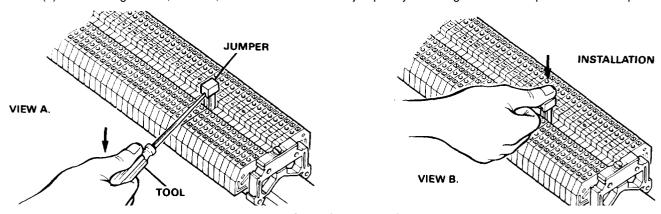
Terminal Strips (sheet 2 of 3) Jumpers
